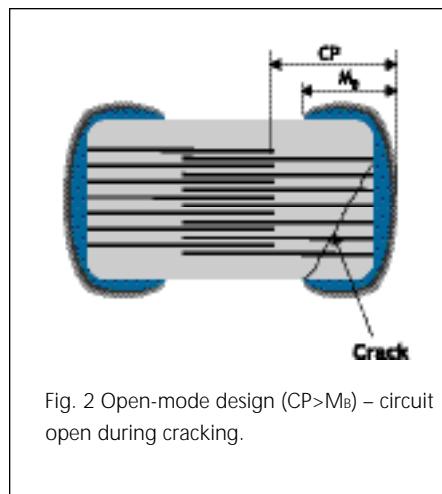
Open-mode design ($CP > MB$) – circuit open during cracking.
